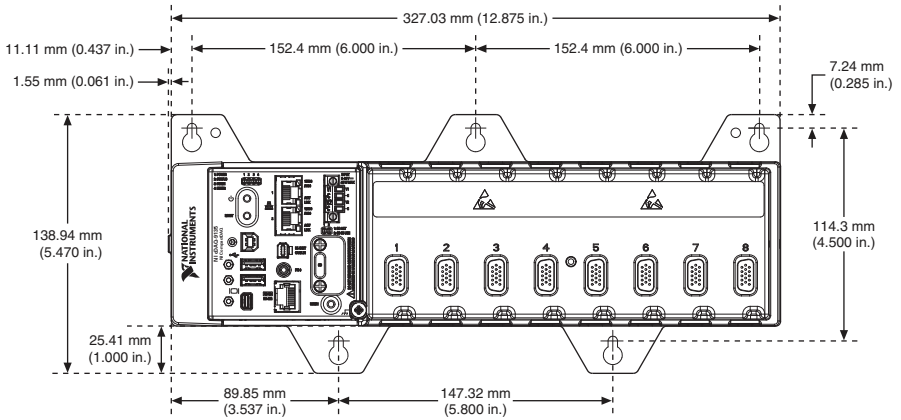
Dimensions of the cDAQ-9132/9134/9136 with Mounting Plate Installed
